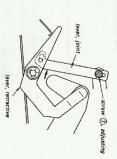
Pinch roller stroke adjustment head deck - back view -
